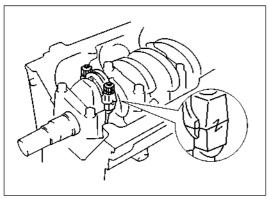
6 - 13 Disassemble the Cap And Nuts of the Connecting Rod
